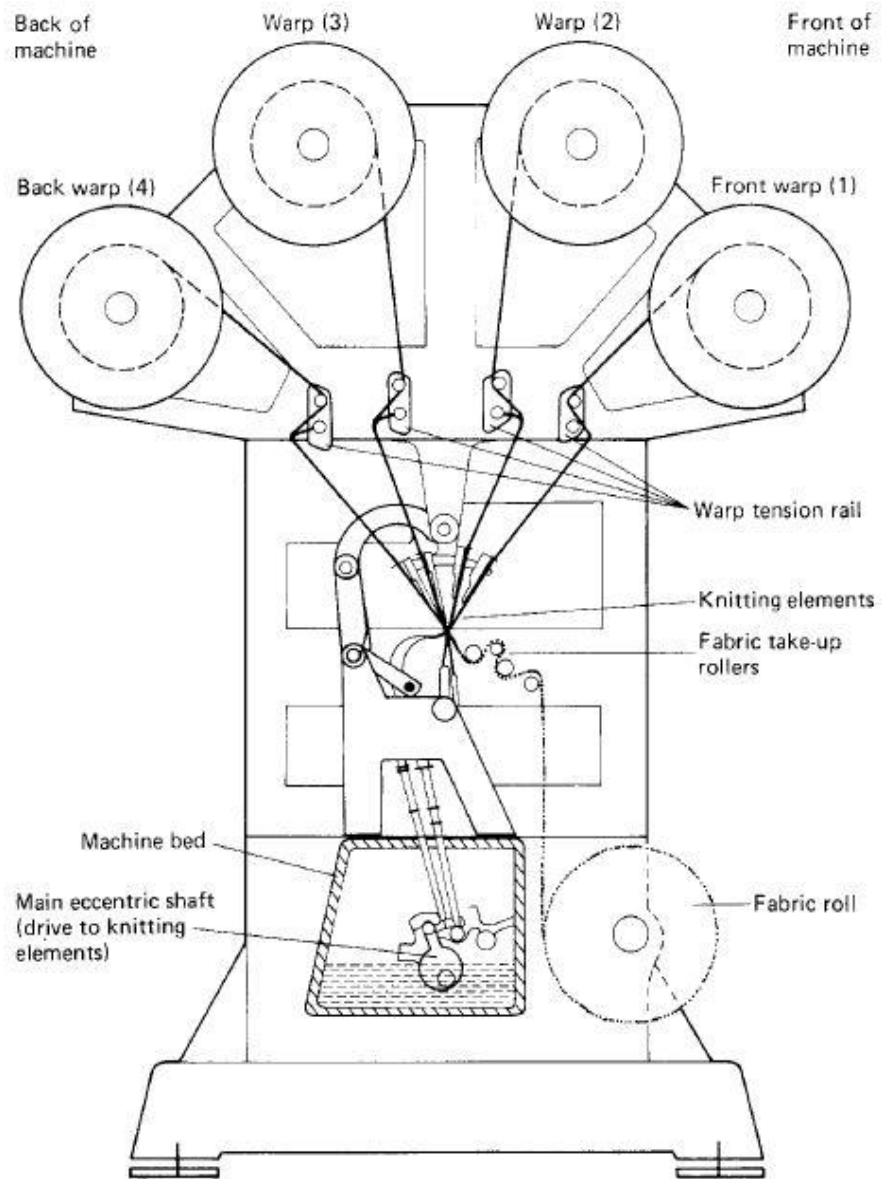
A cross-sectional view of a single bed latched needle Raschel warp knitting machine<sup>25</sup>
